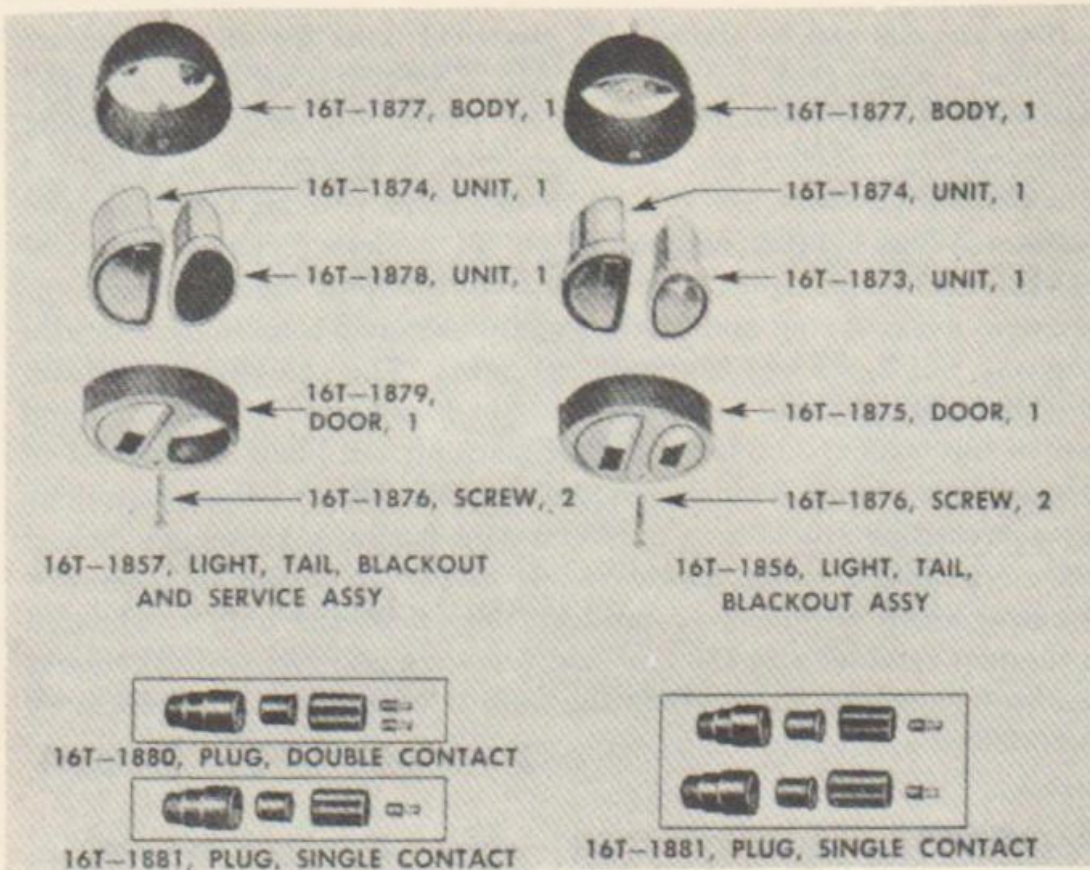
TAIL LIGHT—EXPLODED VIEW
